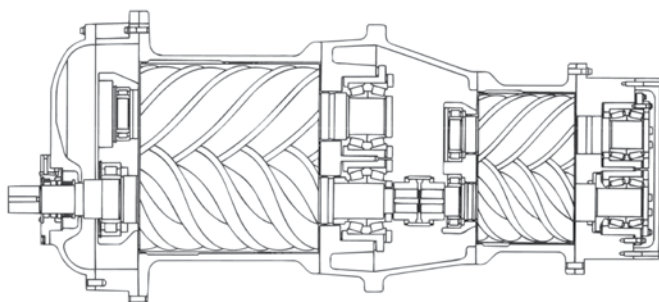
D Two Stage “Tandem” Oil Injected Rotary Screw Compressor
